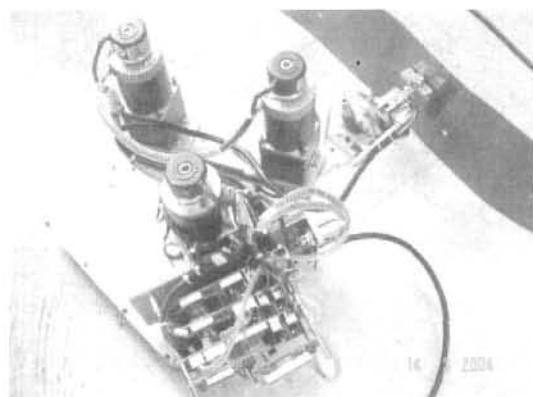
The welding mobile manipulator is tracking along the welding path in experiment
